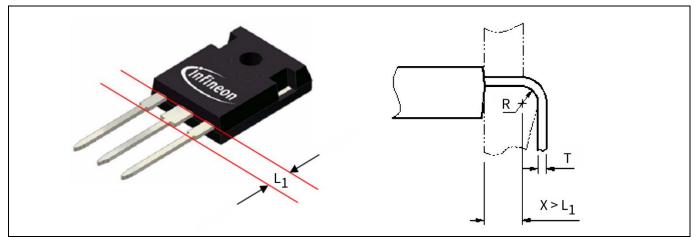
Parameters for recommended minimum clamping distance and radius for lead bending.
